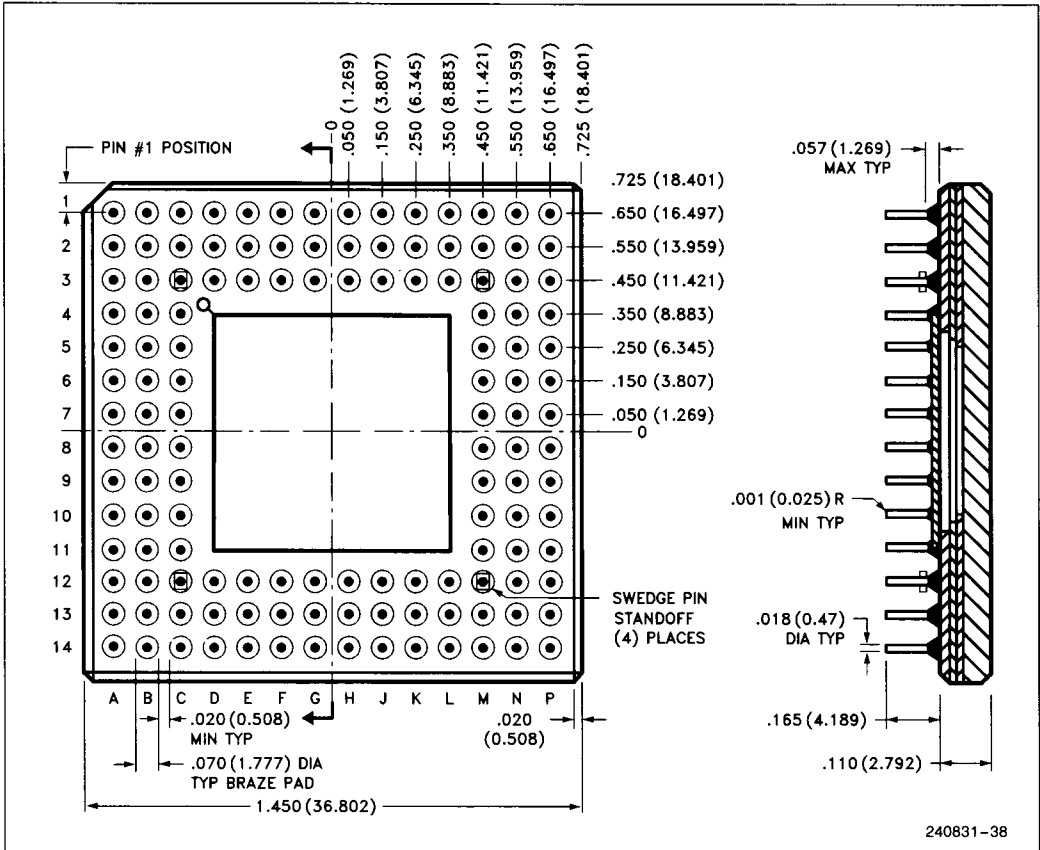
132-Pin Ceramic PGA Package Dimensions
